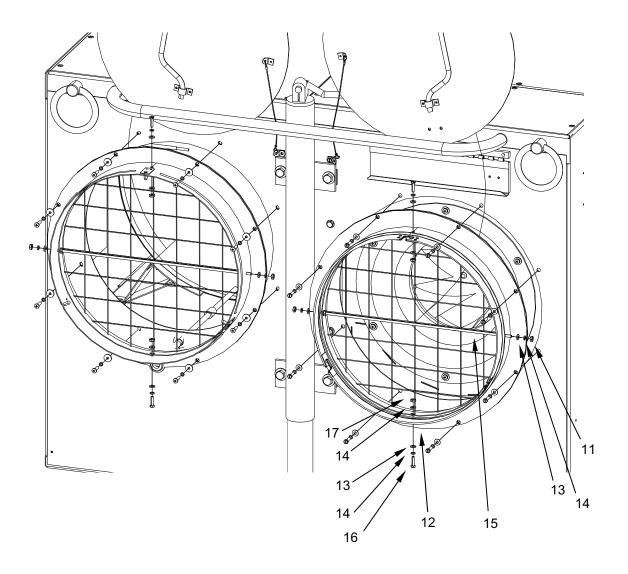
Inlet Fan Assembly (Sheet 3 of 3) 0100 00-4
